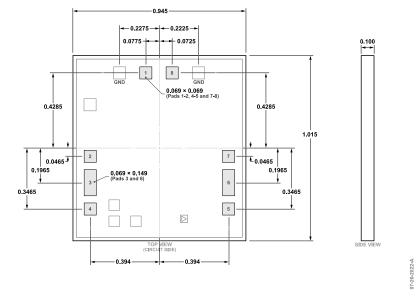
8-Pad Bare Die [CHIP] (C-8-28) Dimensions shown in millimeters
